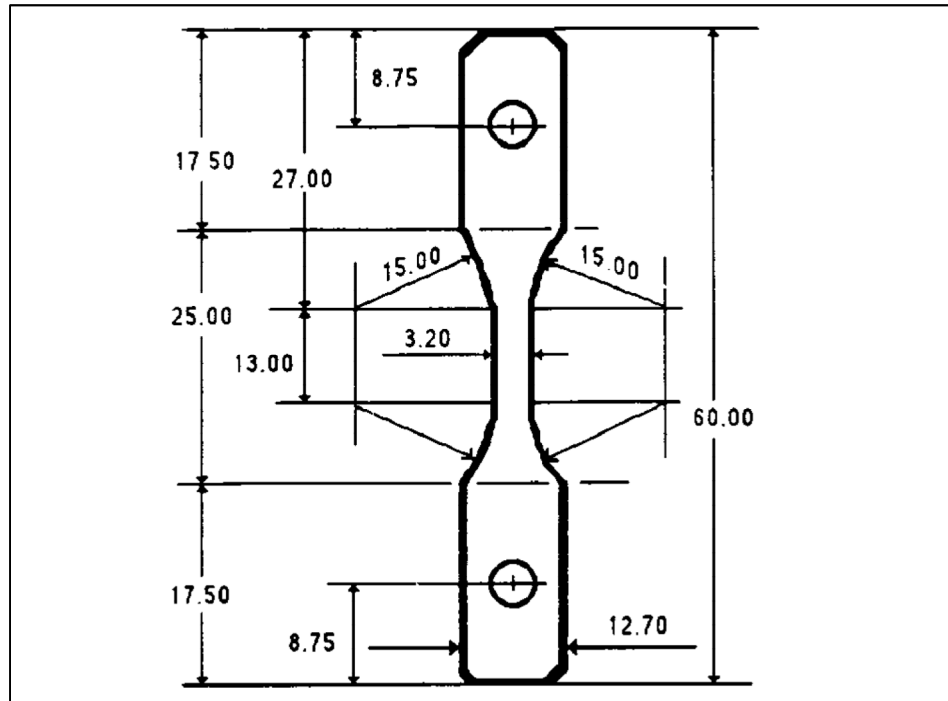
Dimensions (mm) of NCTL specimen test method D1822 type "L" (ASTM D5397) [9]
